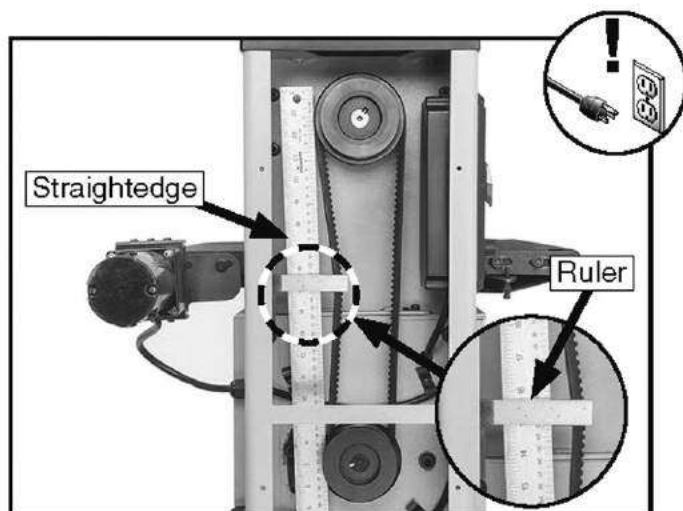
Checking V-belt tension with a straightedge and a ruler (belt access panel removed).
